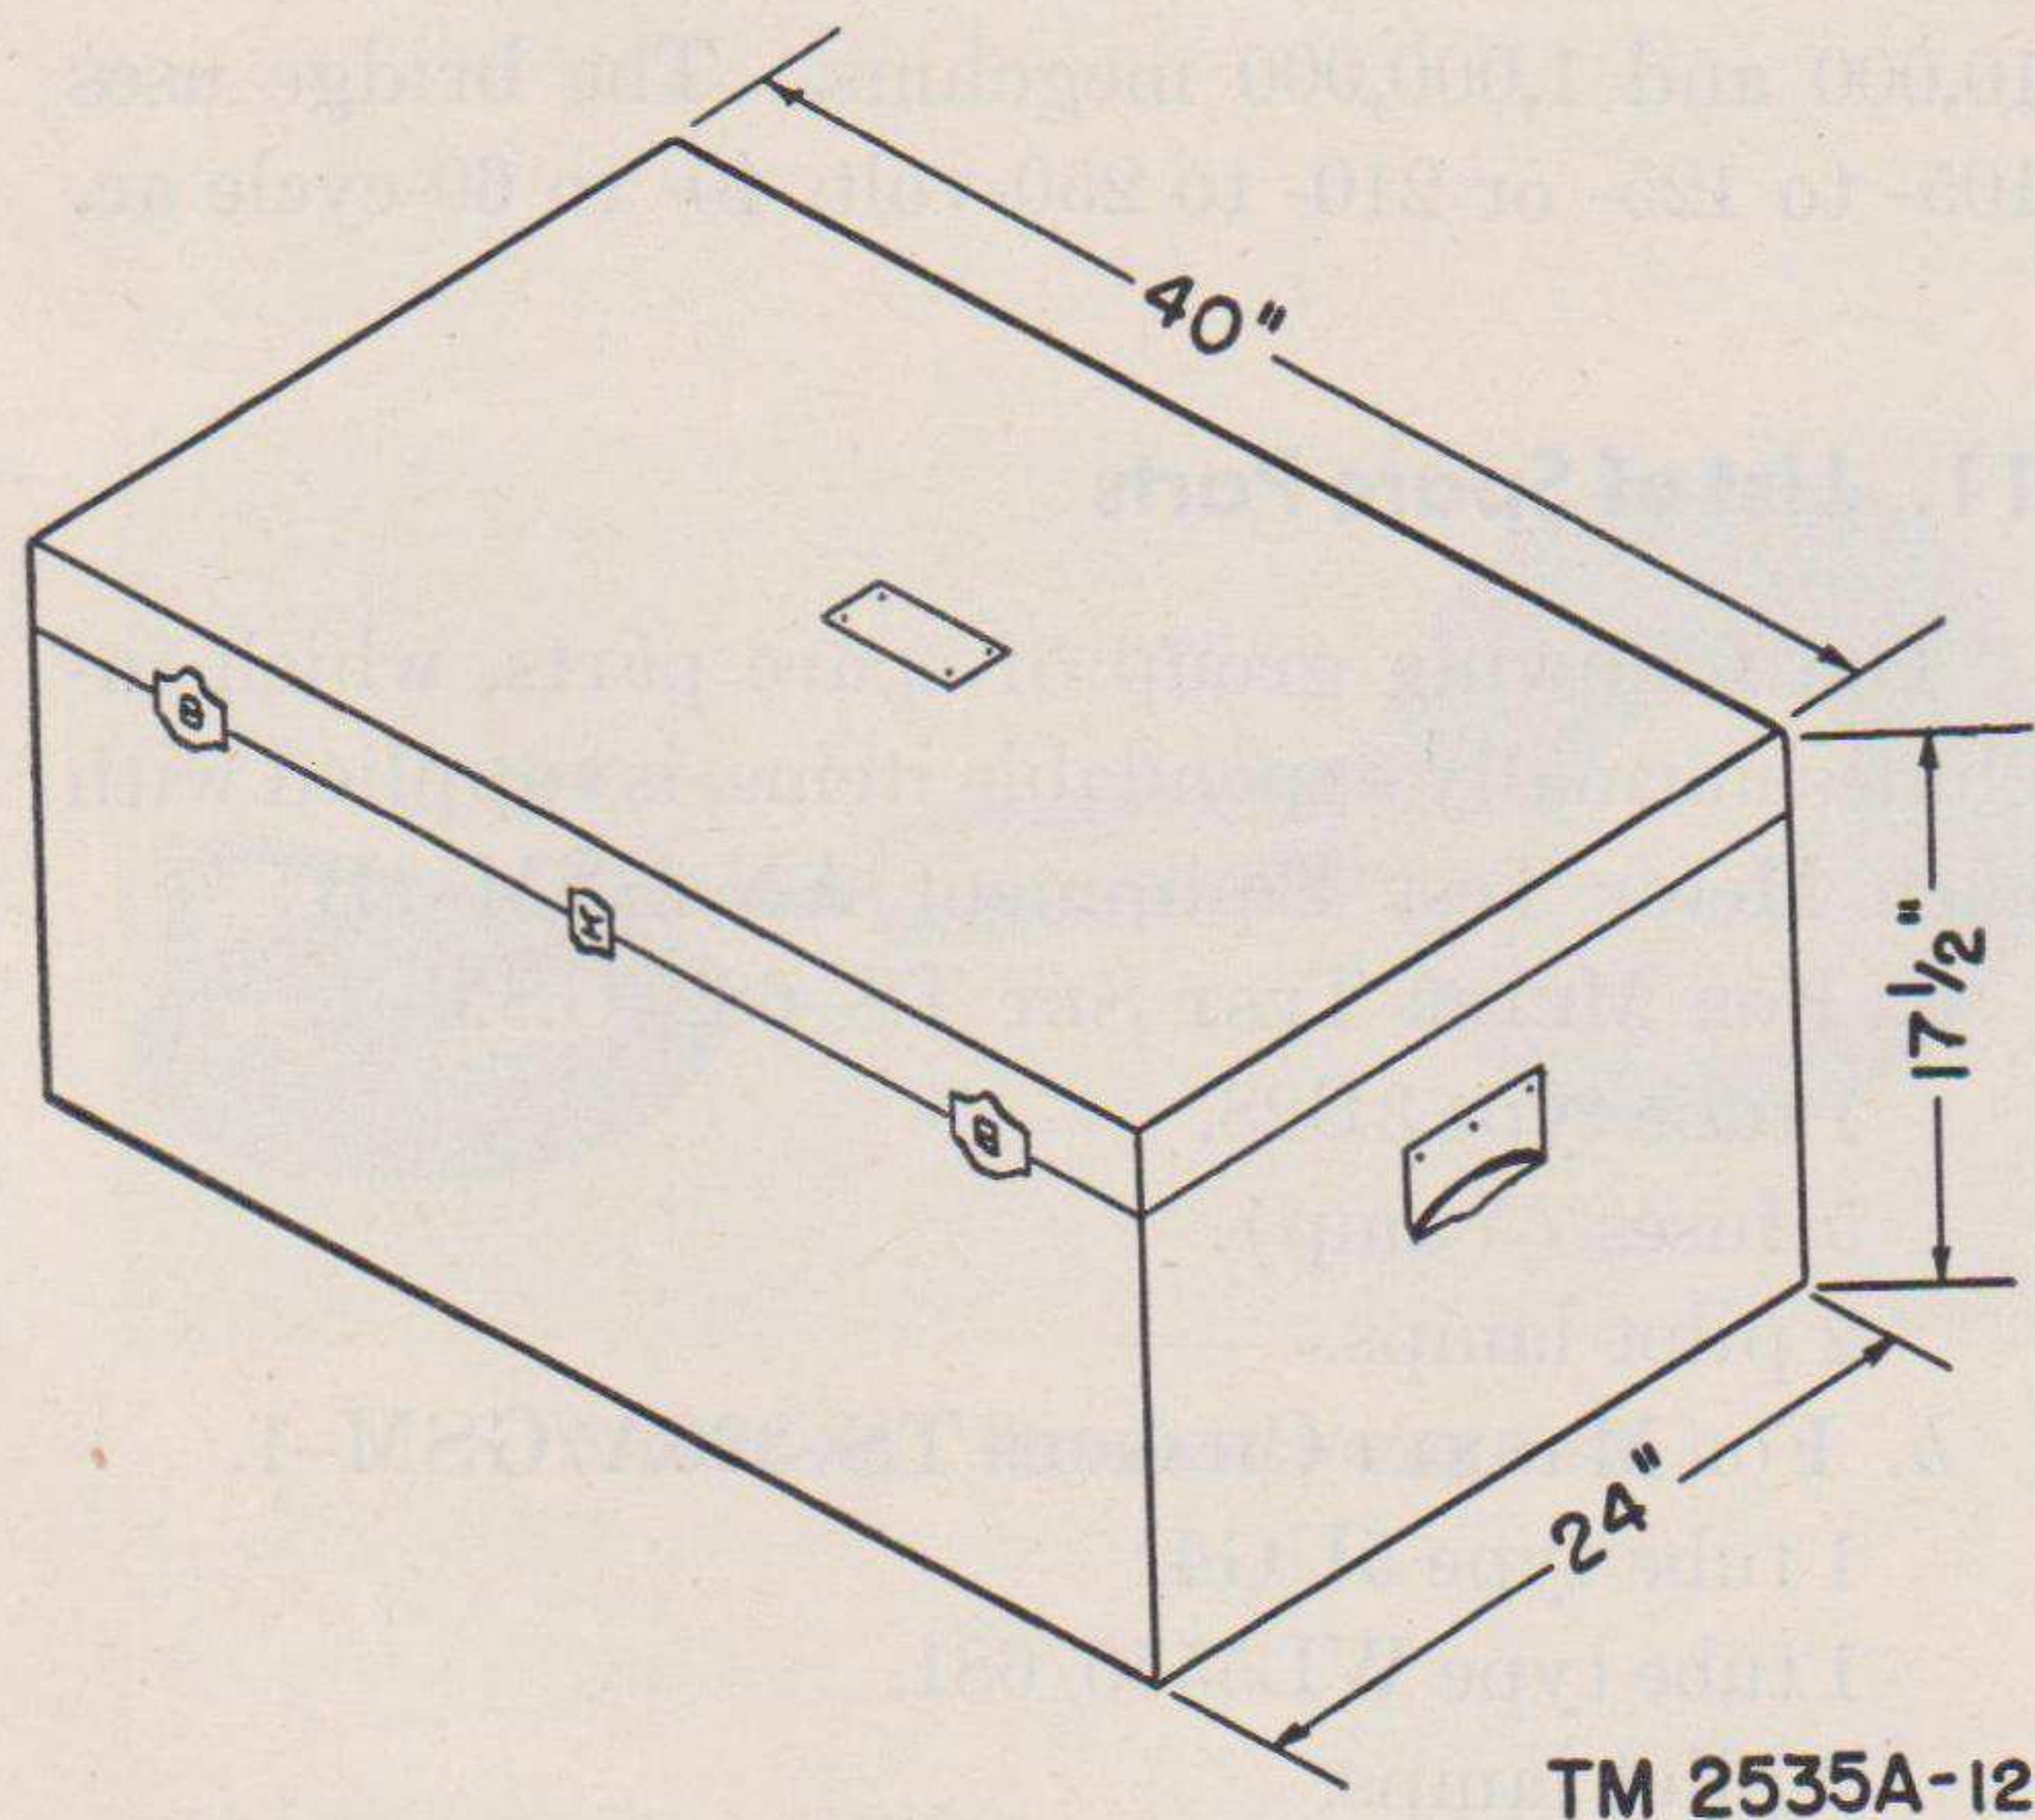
Dimensional drawing of Case CY-721/GSM-1.
